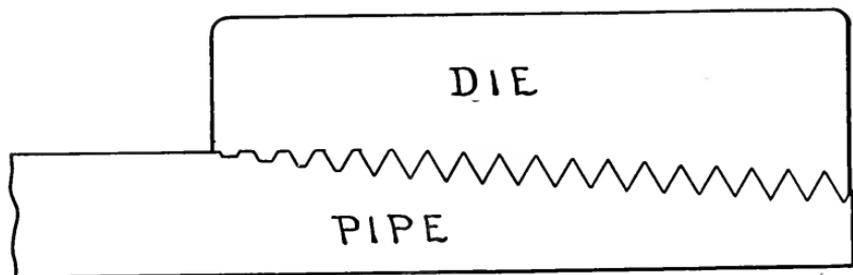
ILLUSTRATING A COMPLETED PIPE THREAD.
